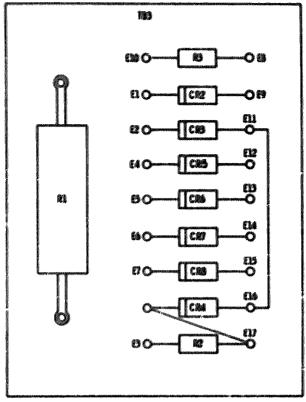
Test Set Subassembly MX8638A/APS-94D, Unit 1A2, rear chassis parts location
